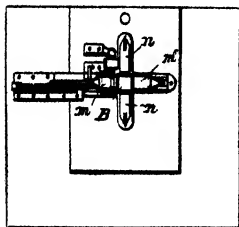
Tea Packetting or Parcel-ling Machine (plan of folding and discharging device).
